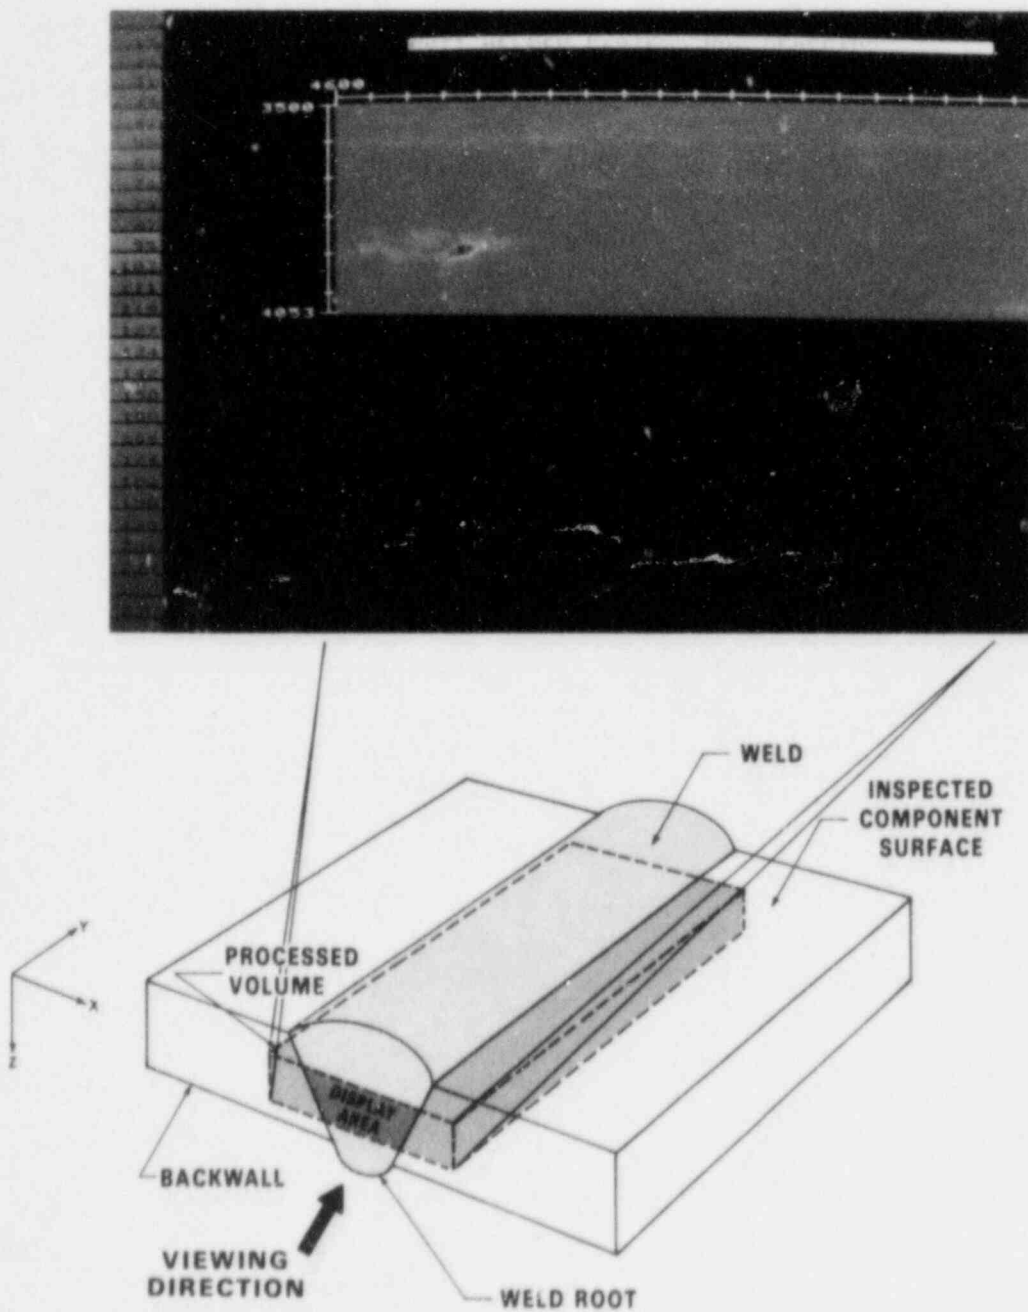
BUTT-WELDED CARBON STEEL PLATE SPECIMEN - WELD METAL CRACKING
